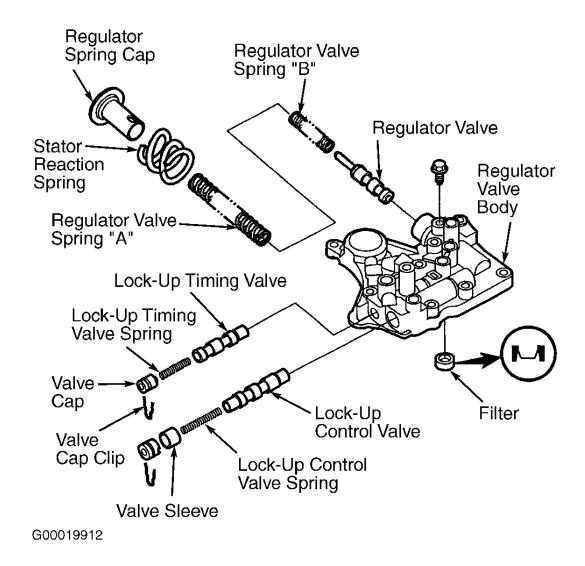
Exploded View Of Regulator Valve Body Courtesy of AMERICAN HONDA MOTOR CO., INC.
